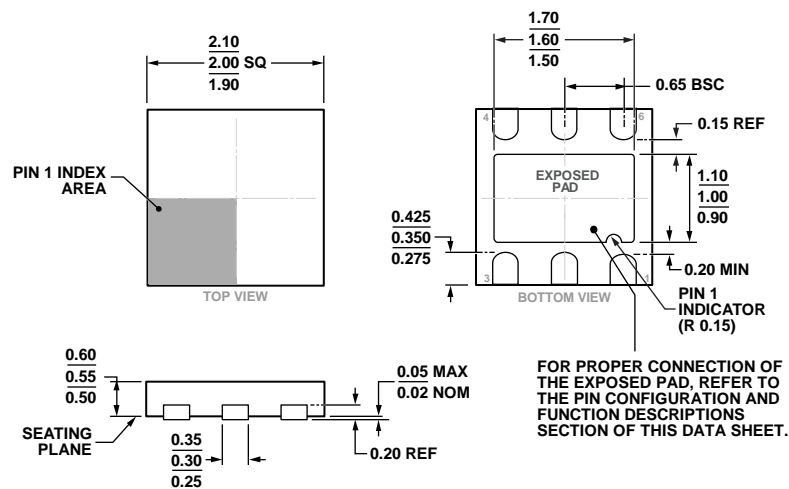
6-Lead Lead Frame Chip Scale Package [LFCSP_UD]
